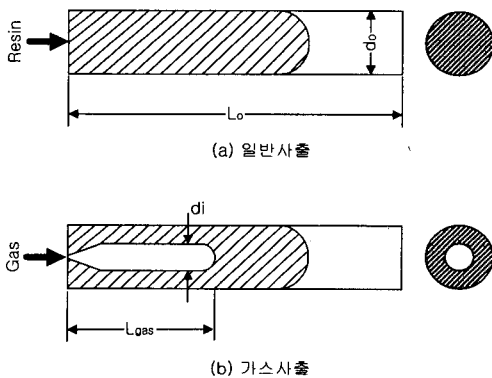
Geometrical shape of model for gas assisted injection molding process( $L_o=500$  mm,  $d_o=10$  mm)
